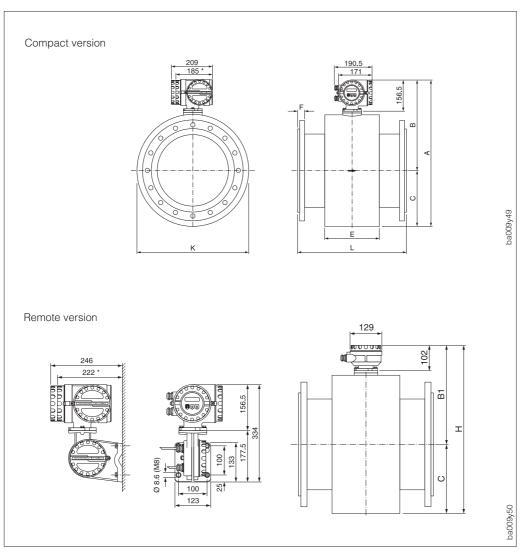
Dimensions Promag 33 F (DN 350...2000)
